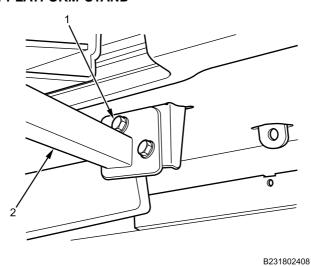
Right Side Gunner Platform Stand Mounting Bolts.
